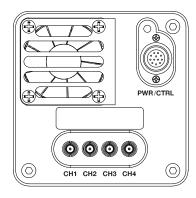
VC-21MX2-M/C230I Mechanical Dimension
